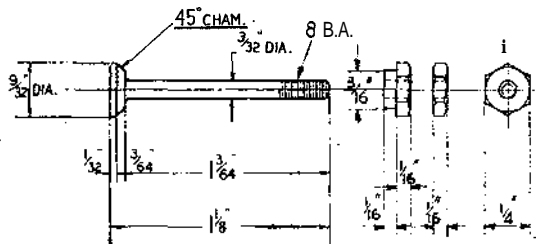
Valves, with adjusting and locking nuts (8 off)
